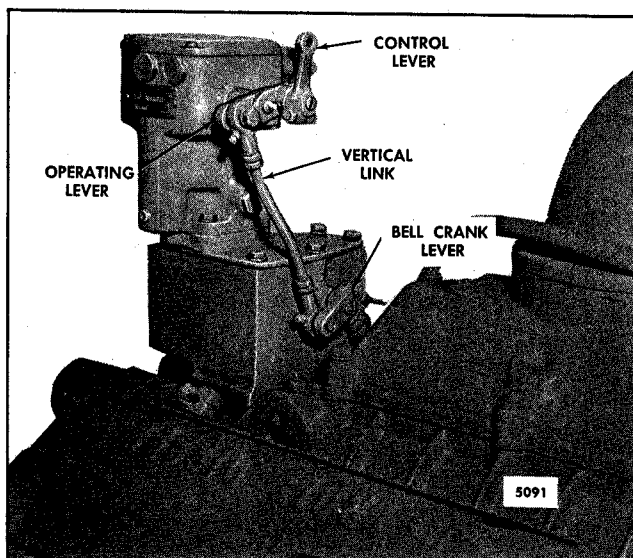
Hydraulic Governor Controls (6V Engine)
